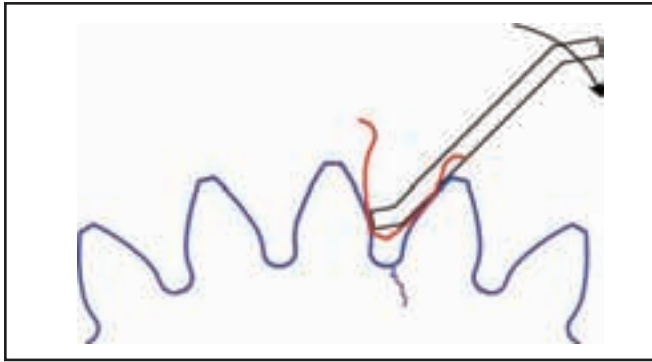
Tooth breakage caused by leverage resulting from insufficient backlash.
